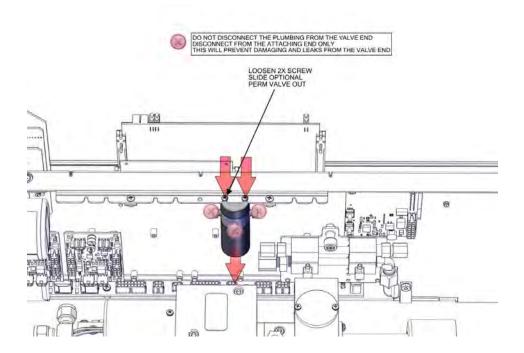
Removing and Replacing the Solenoid Valve pt 2
